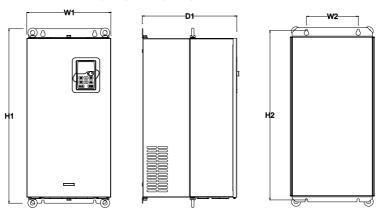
Wall installation diagram for 660V 22kW-132kW VFD models
